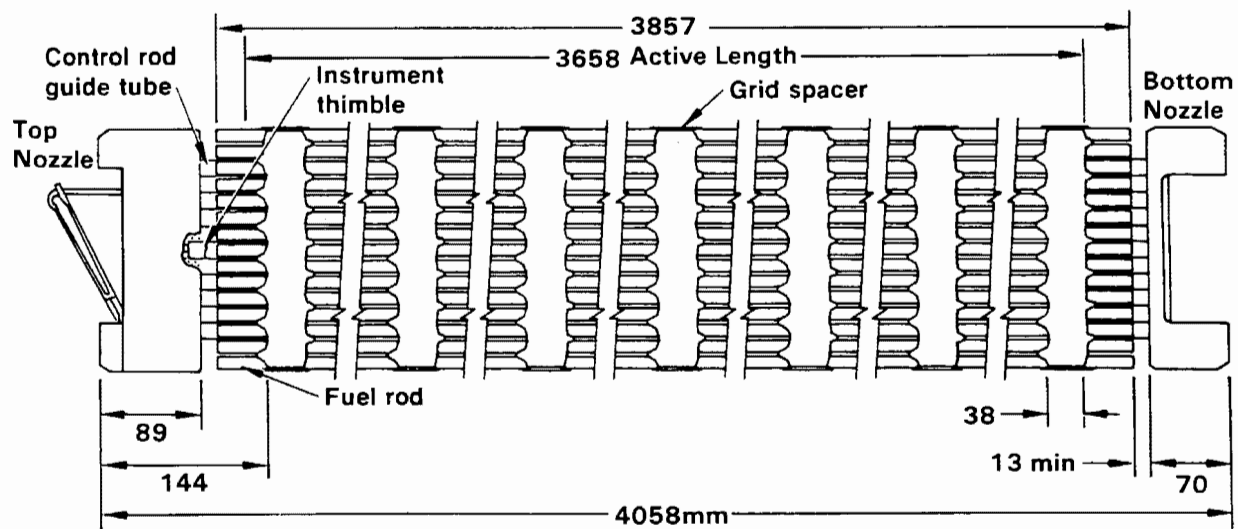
Surry 15 x 15 PWR Fuel Assembly
